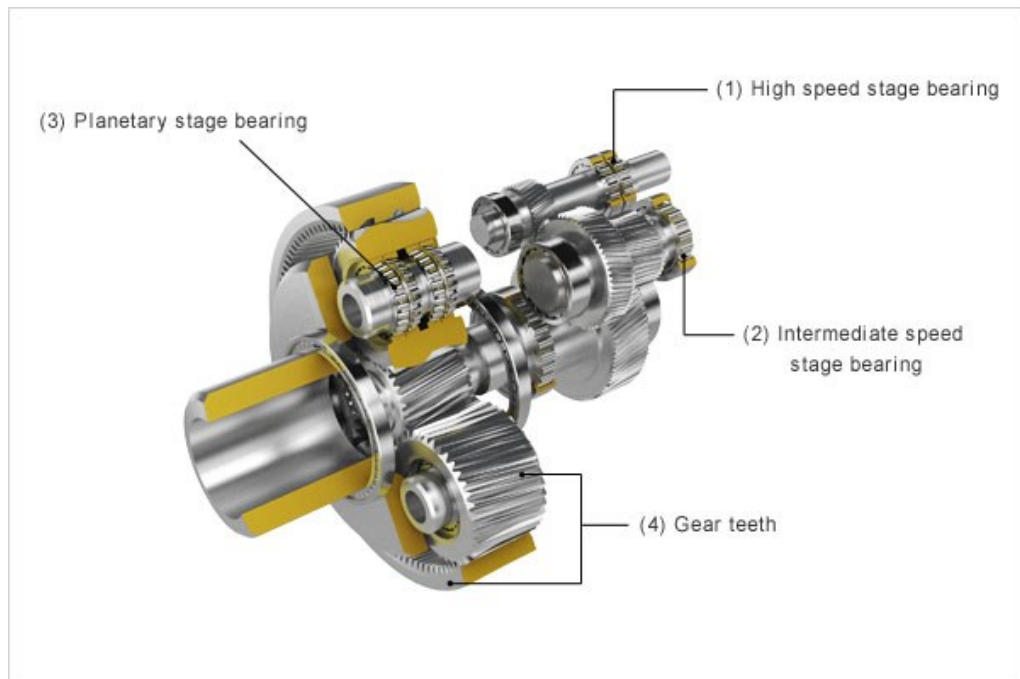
Scheme of a typical wind turbine gearbox; courtesy of [47]
